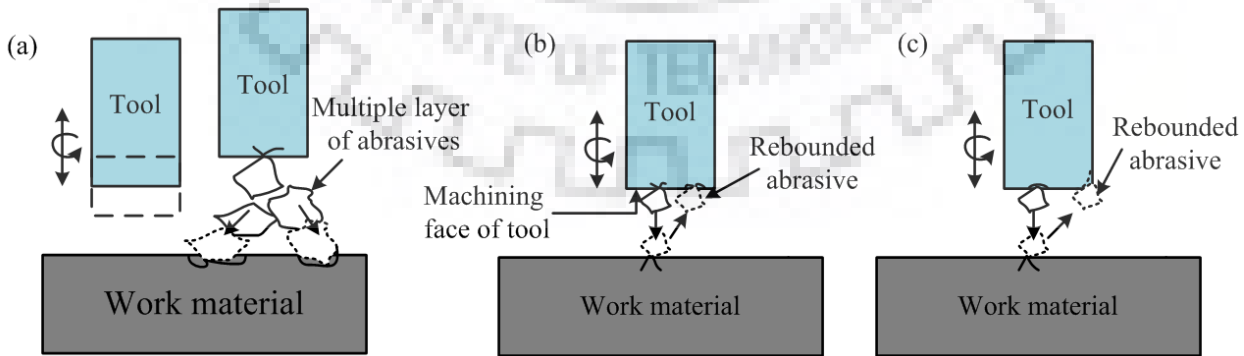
Tool-abrasive interaction (a) multiple layers of abrasives in the machining gap (b) wear of machining face of tool (c) wear of tool edge
